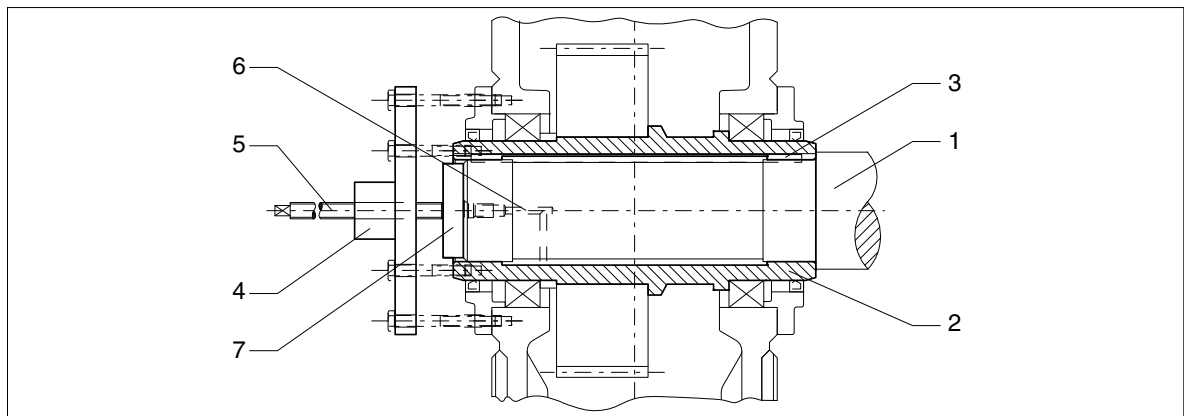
Hollow shaft with parallel keyway, demounting with hydraulic lifting unit
